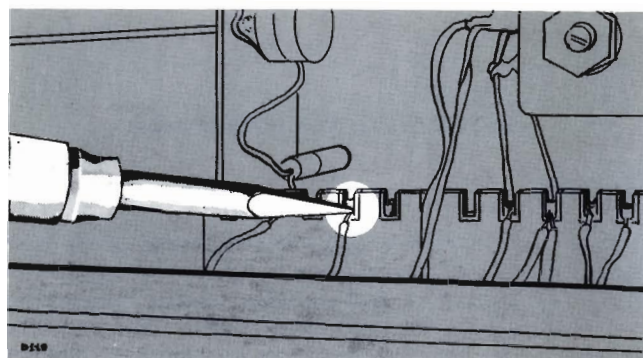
Correct method of applying heat in soldering to a ceramic strip.
